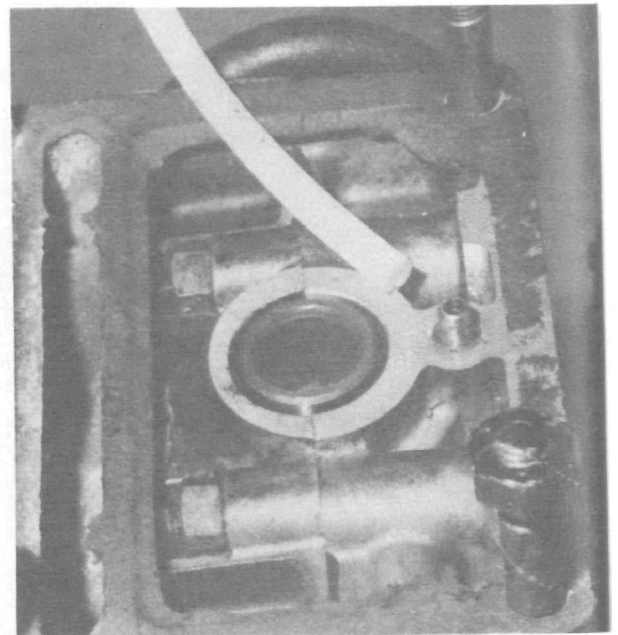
Connector added to check valve on engine 29 for acquisition of sample
